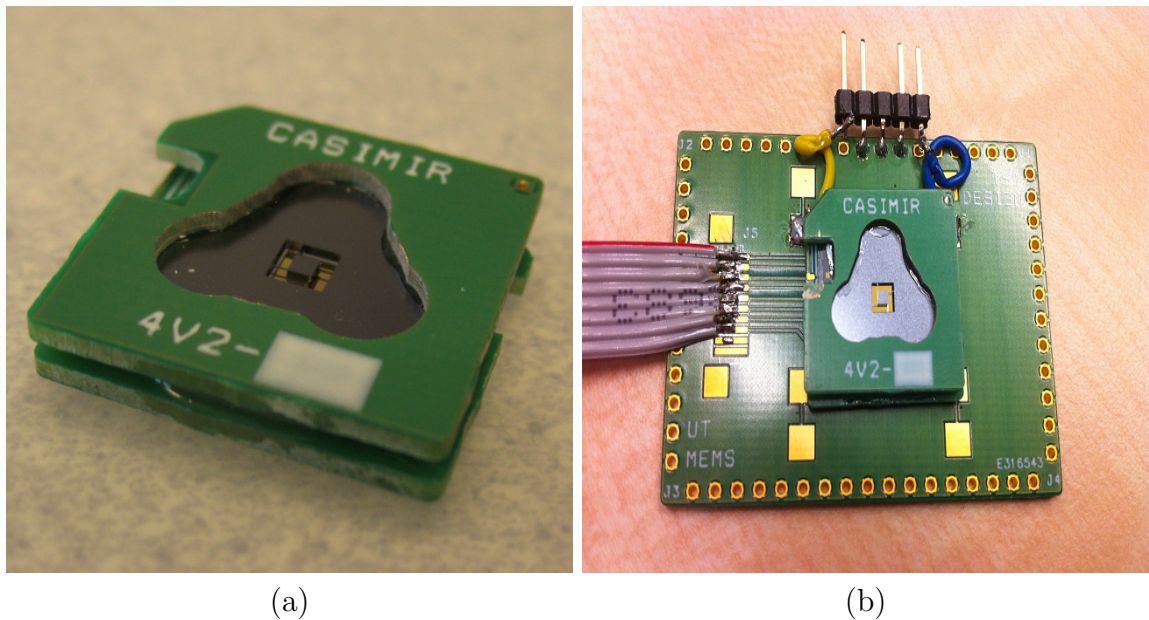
(a) Photograph showing the silicon chip mounted between two thin PCB's & (b) a complete assembled sensor module.
